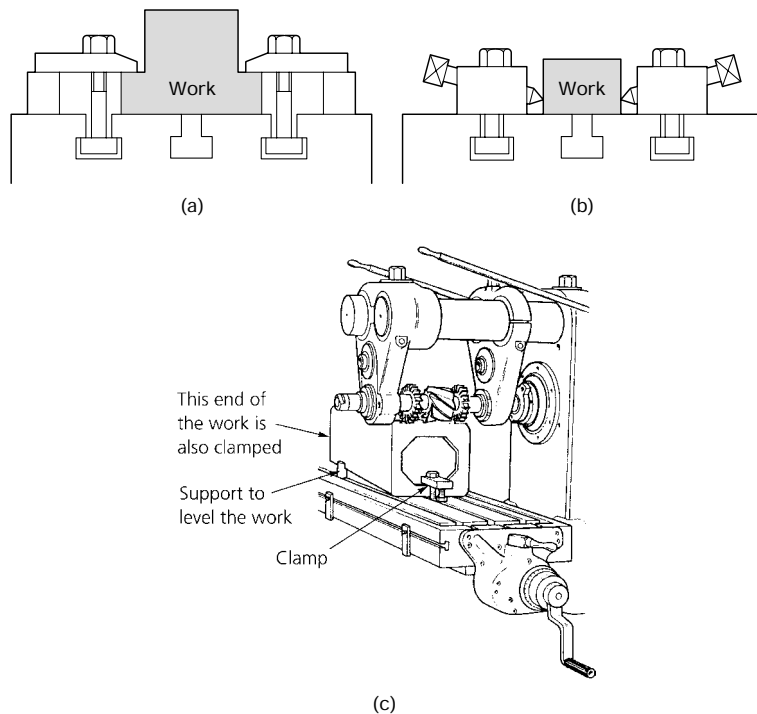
Holding larger work: (a) use of clamps; (b) use of table dogs; (c) levelling work
